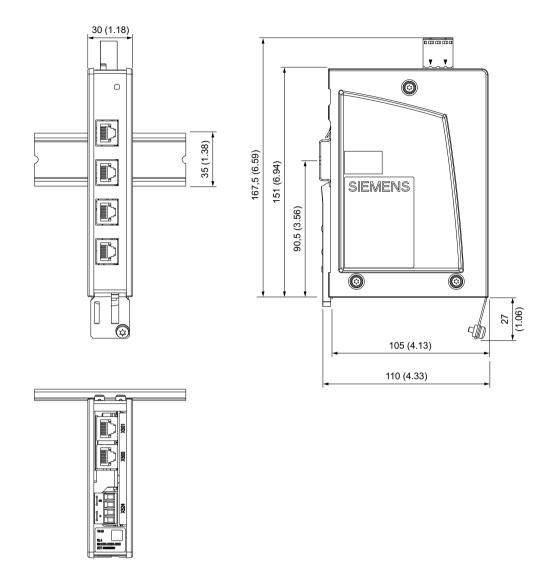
Dimension drawing of the DRIVE-CLiQ Hub Module DMC20, all data in mm and (inches)
